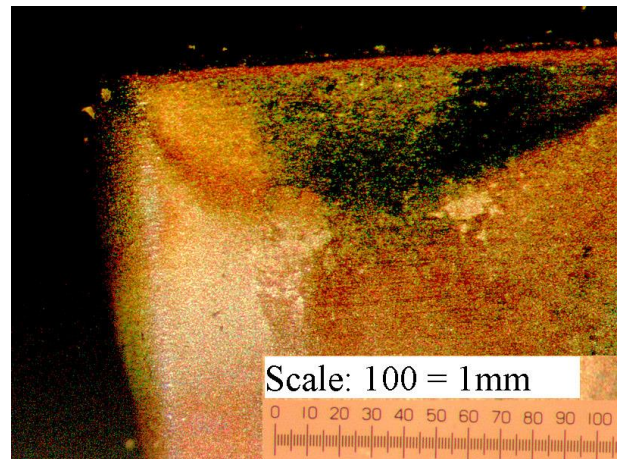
Picture showing flank wear for a air-cooled cut after 7 minutes of machining at a cutting speed of 190 m min⁻¹, and feed rate of 0.23 mm/rev with a 2 mm depth of cut
